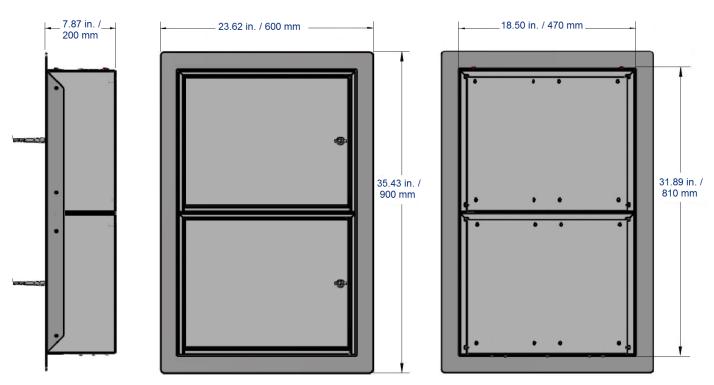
DOUBLE SK Enclosure Overall Dimensions with Decorative Trim Frame
